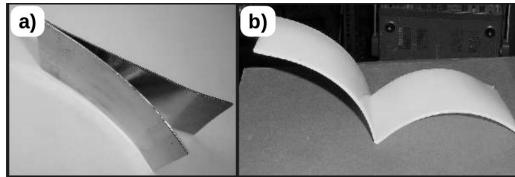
A picture of a) folded pack of Teflon sheet and b) bended steel sheet.
